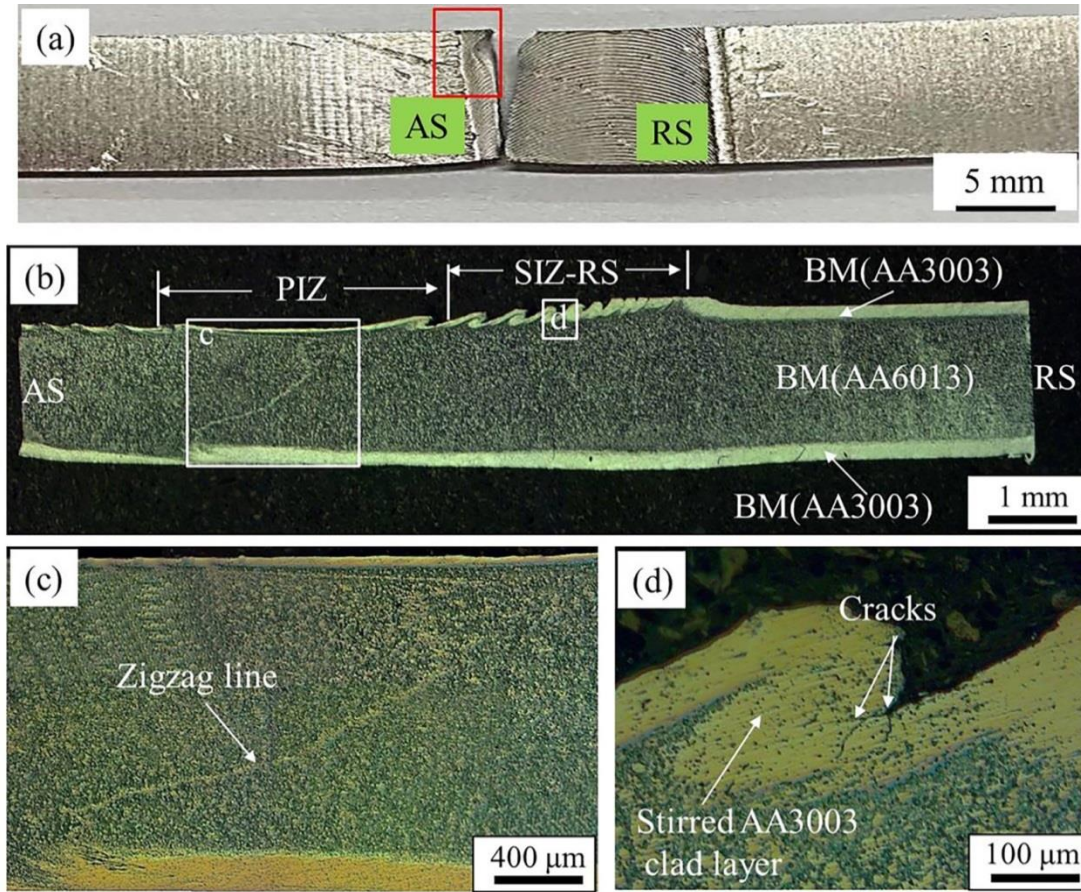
(a) A typical fractured cross-weld FSW joint after fatigue test (100 MPa), (b) cross section of fractured FSW joint, (c) magnified PIZ as marked in Figure 3.13 (b), (d) magnified SIZ-RS as marked in Figure 3.13 (b)
